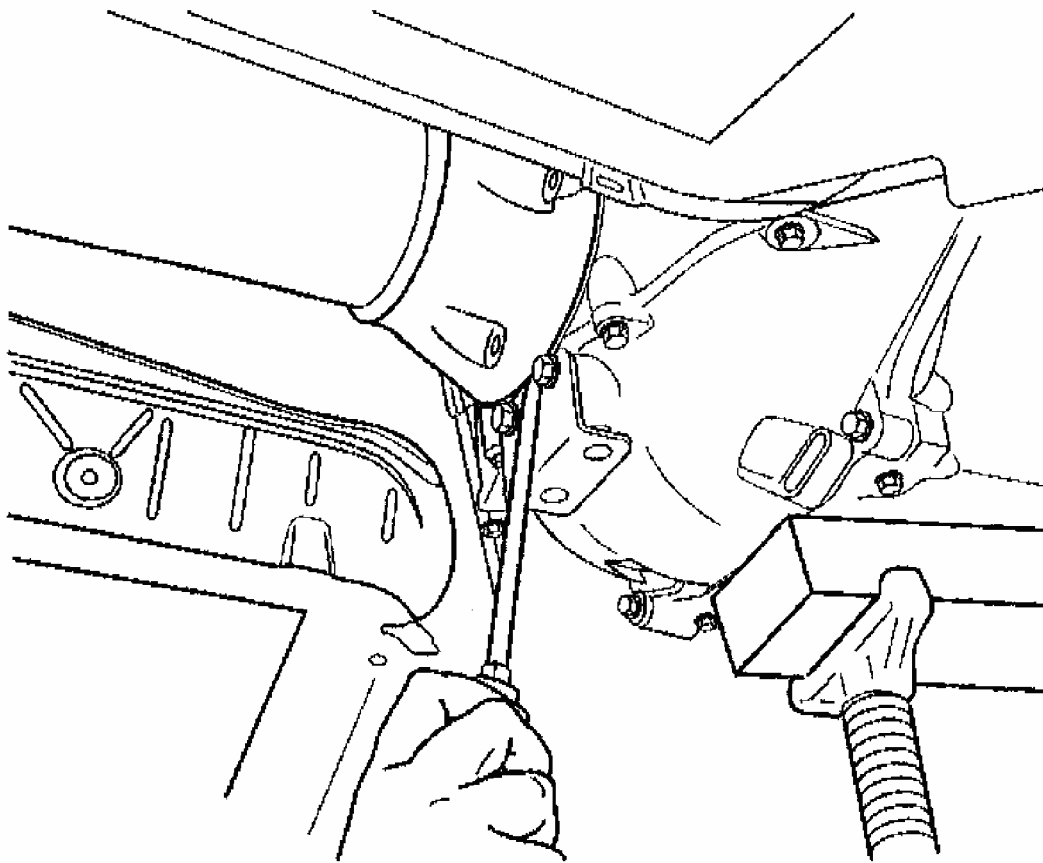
Removing Driveline Support Assembly To Engine Flywheel Housing Bolts
